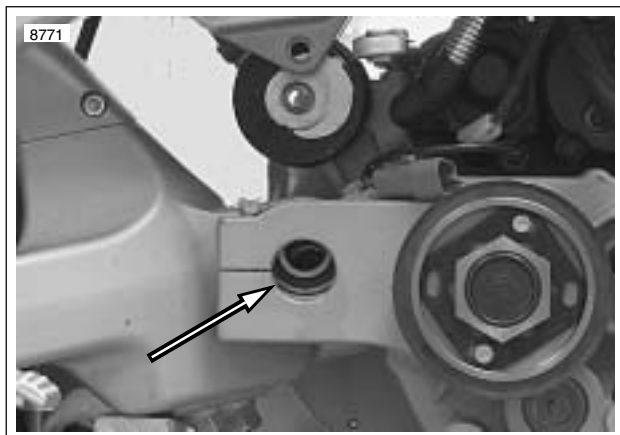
Aligning Swingarm to Crankcase for Pivot Shaft Installation
